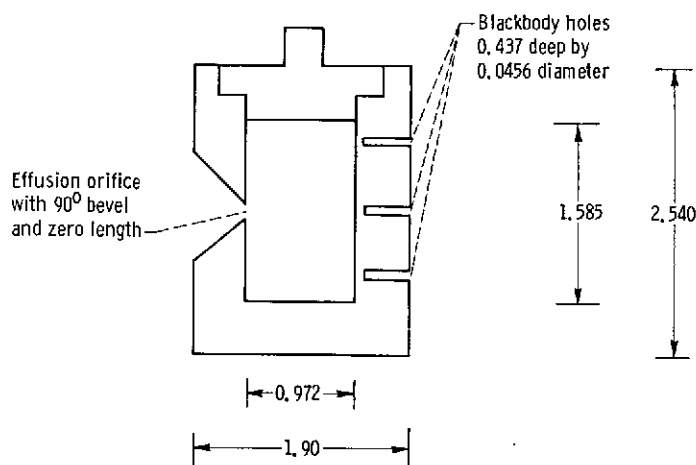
Knudsen cell cross section. (Dimensions are in cm.)
